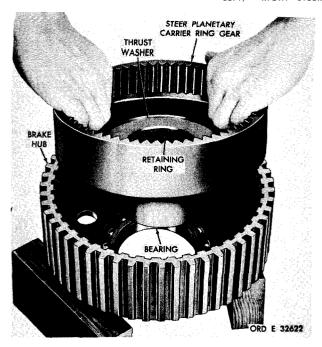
Removing (or installing) steer planetary carrier ring gear assembly
